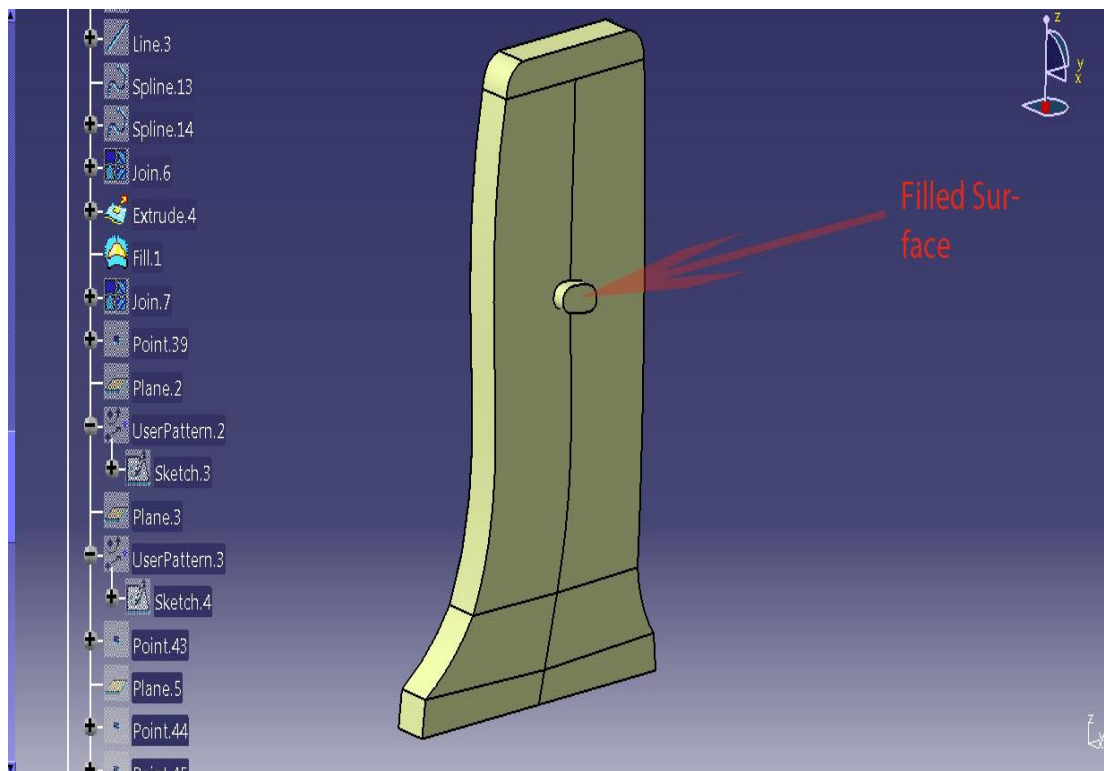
Covering of throttle's pedal pad back side with first multi section surface.
